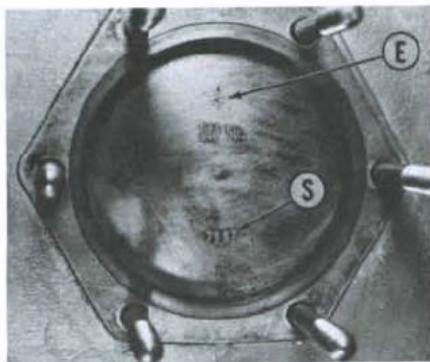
Top of piston showing size marking (S) which gives exact diameter of piston at skirt; and letter & arrow marking (E) which must be installed toward exhaust side of cylinder. Other markings shown have no service significance.
